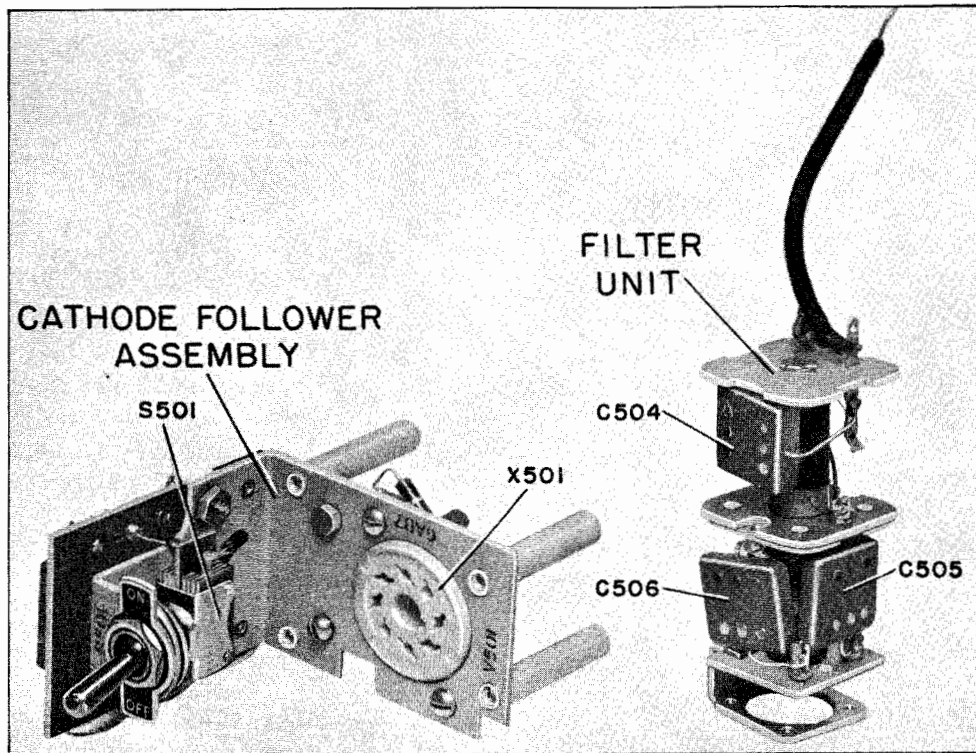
Receiver Coupling Kit Type 10563, Top View
